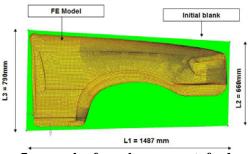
example of panel component: fender, top view of FE model and its initial blank.
